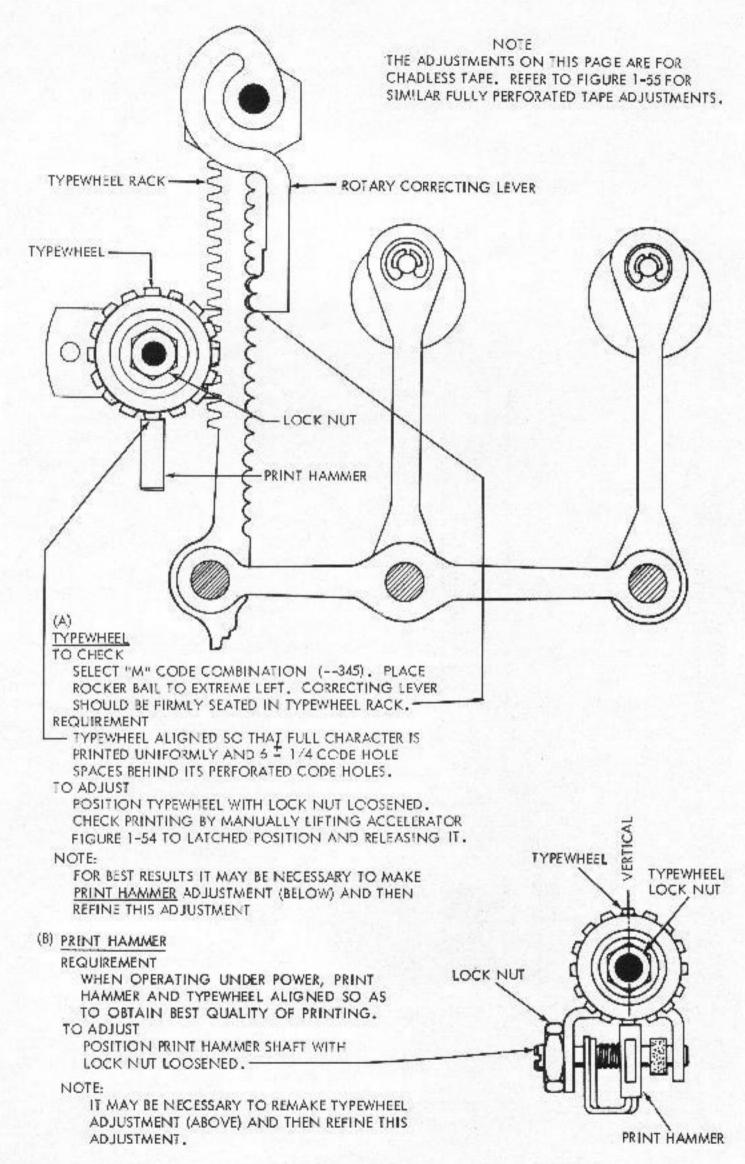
PRINTING MECHANISM FOR CHADLESS TAPE
